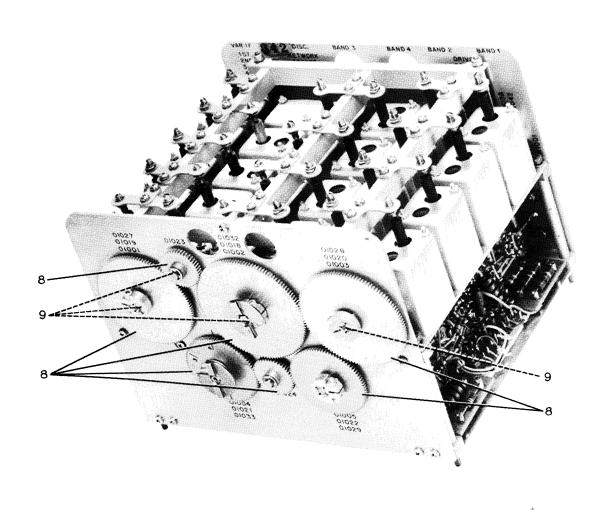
R-F Tuner, Front Oblique View, Lubrication Points
